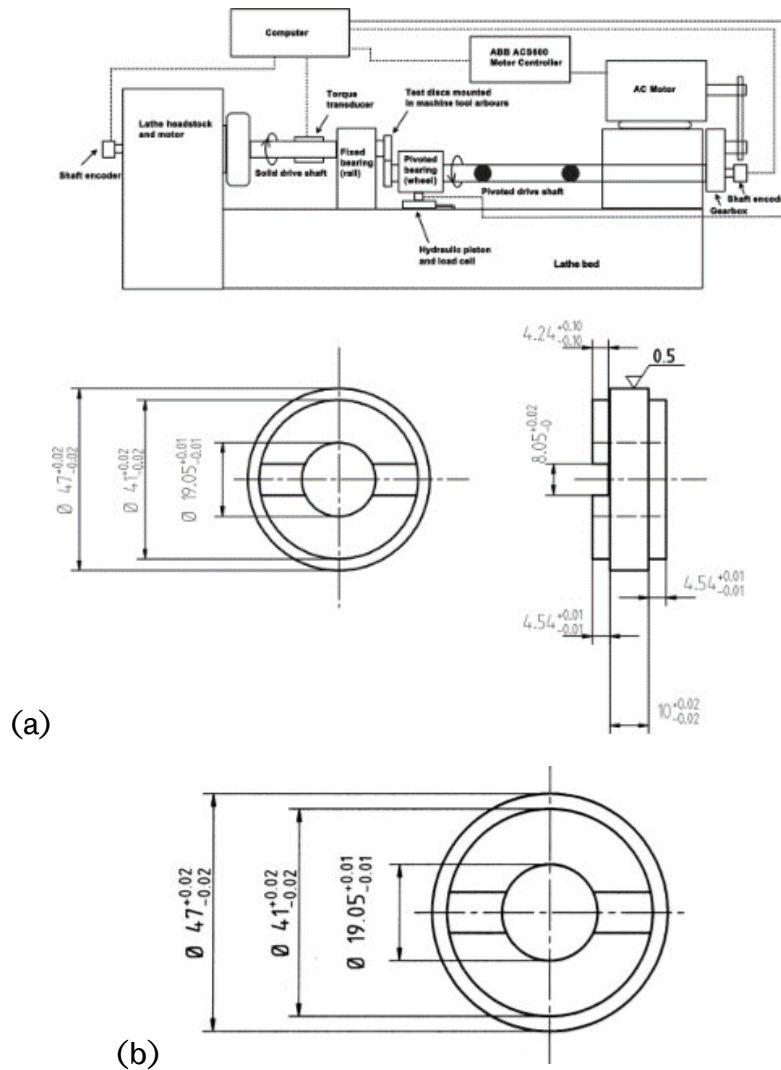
(a) Twin disc machine layout and (b) Twin disc dimensions (Fletcher and Lewis, 2013)
